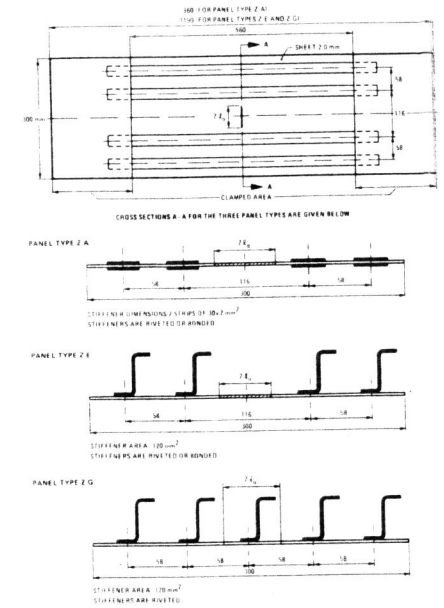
Dimensions (mm) and detailed geometry of specimens
